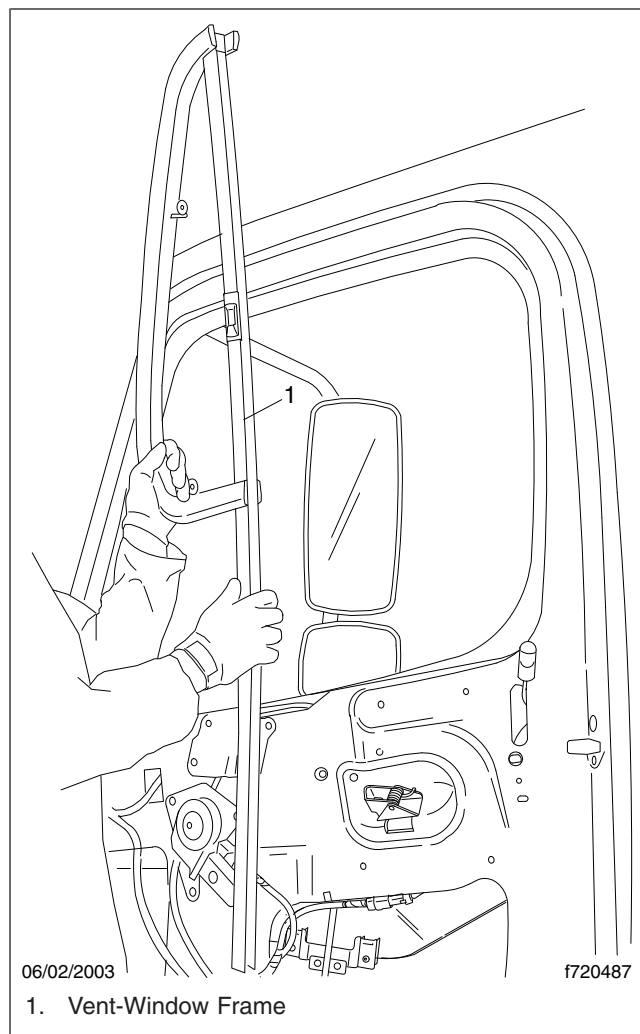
, Remove/Install the Vent-Window Frame Assembly
